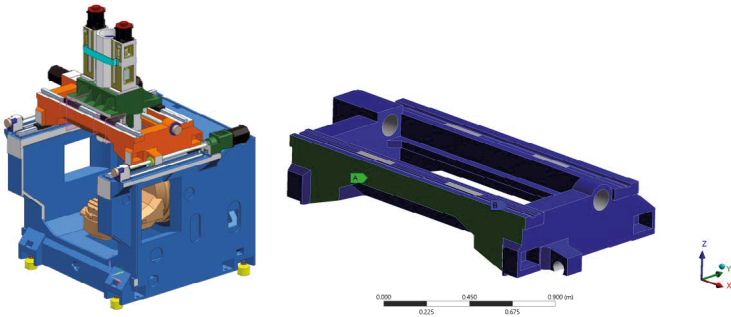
(a) Left: CAD model of the machine tool under study; (b) Right: Geometry of the saddle of the X-axis. In blue surfaces exposed to the environment. In dark green surfaces exposed to cooling fluid
